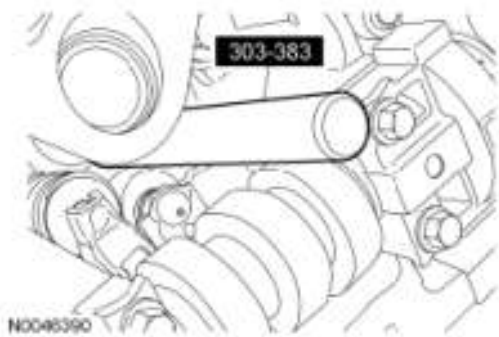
Identifying Valve Stem Oil Seal Installer (303-383)
